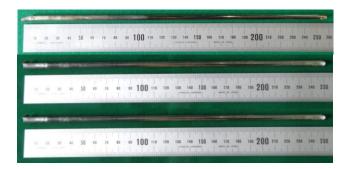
Output U-10wt.%Zr-5wt.%Mn fuel slugs fabricated by improved casting method; (a) vacuum, (b) reduced atmosphere, and (c) inert atmosphere.
